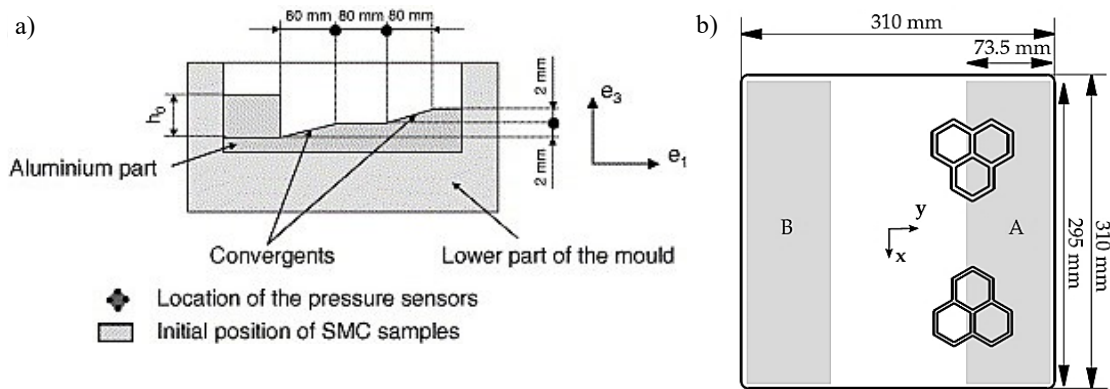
Out-of-plane flow testing setups: a) Stepped plate with incline [128]; b) plate with honeycomb geometry protruding from the surface [40]
